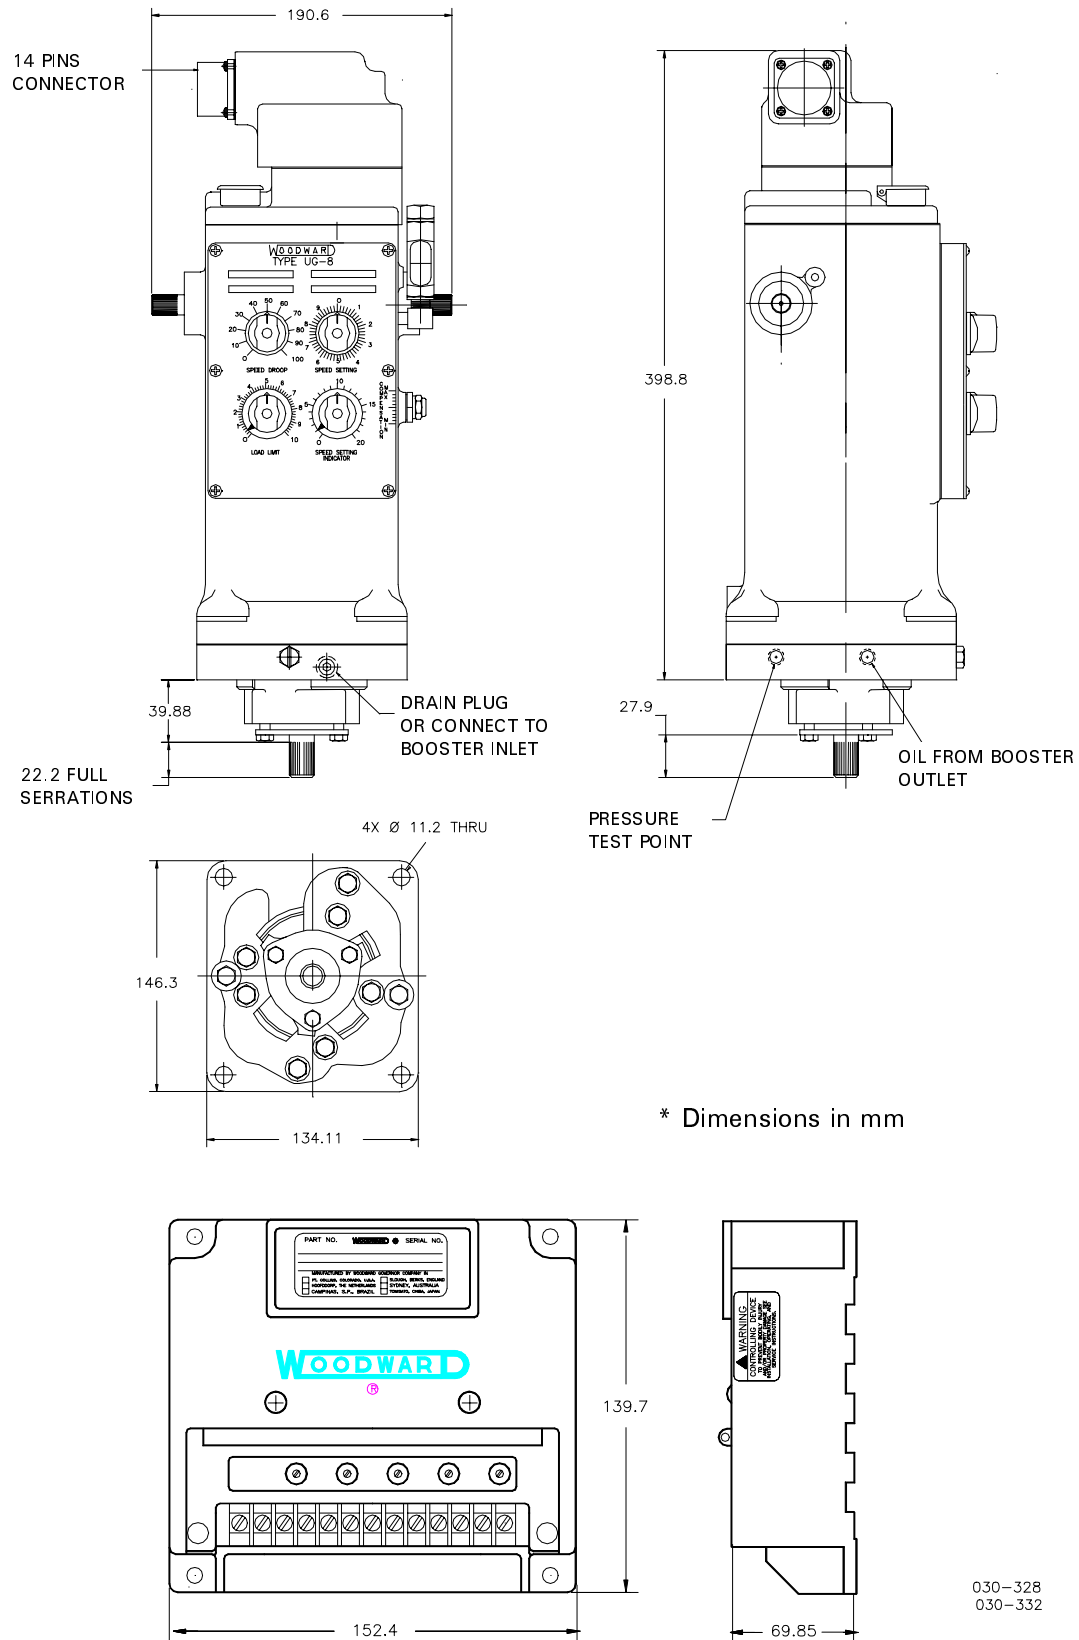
Outline Drawing UG MAS Governor and UG MAS Driver Box
